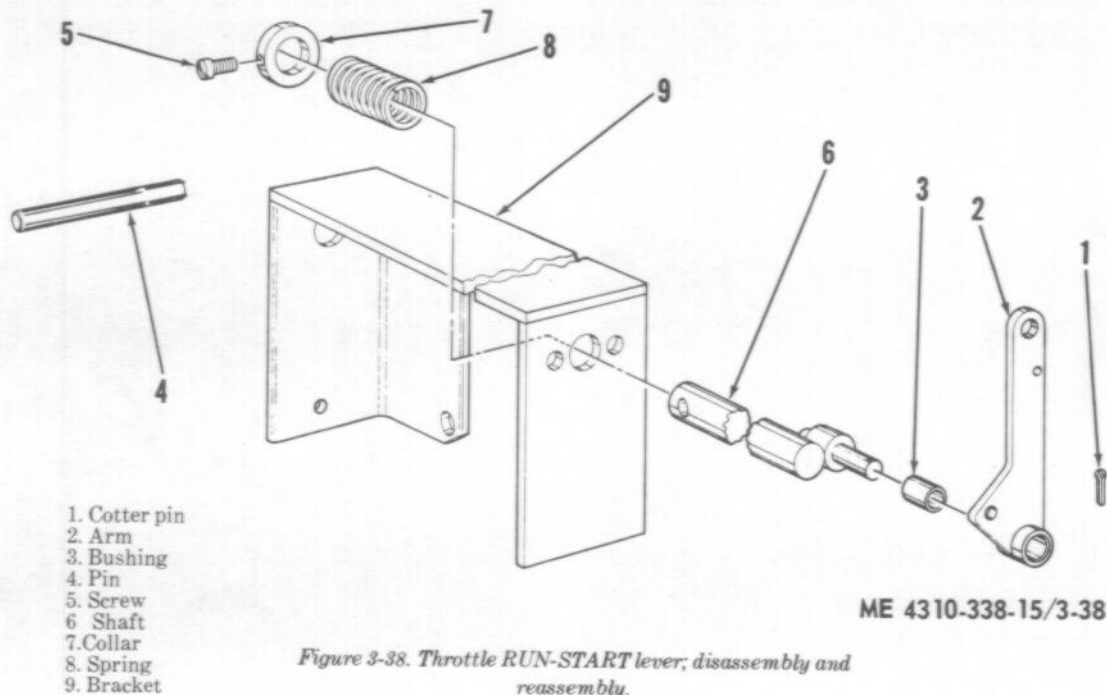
Throttle RUN-START lever; disassembly and reassembly.
